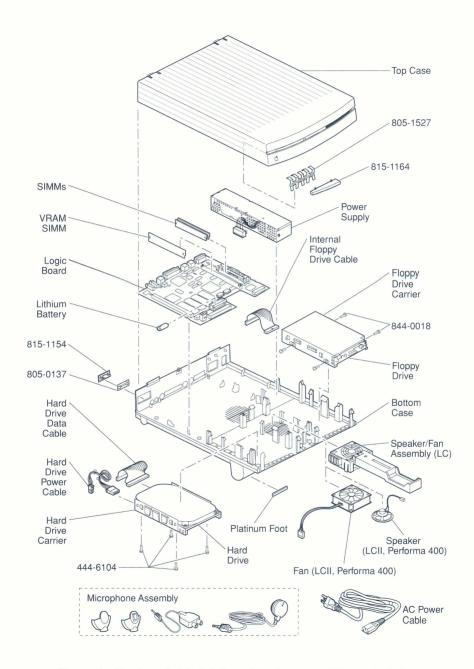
Macintosh LC, LC II, and Performa 400 Exploded View
